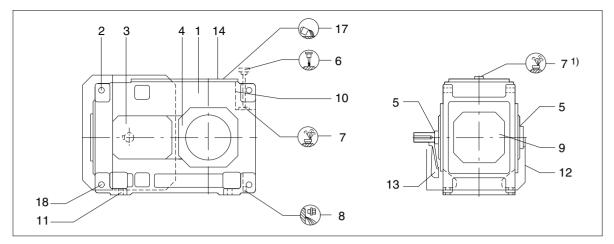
Gear-unit features on gear units type $H..H \le 12$
